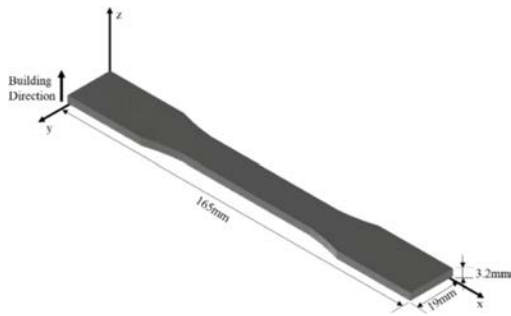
Dimension of tensile specimen and building direction in 3D printing.
